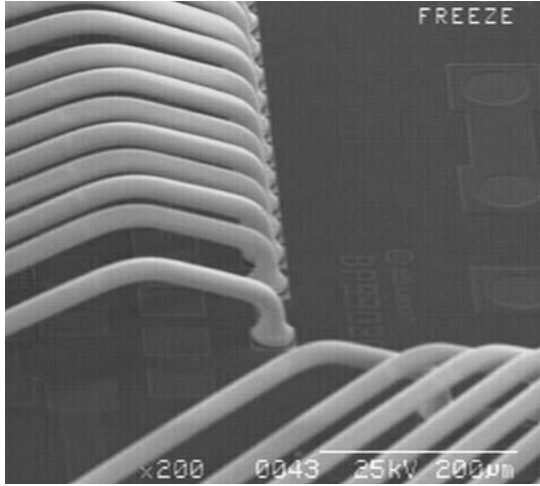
Ball bonds in a 50µm pitch package using 0.0009 in./23µm gold wire
